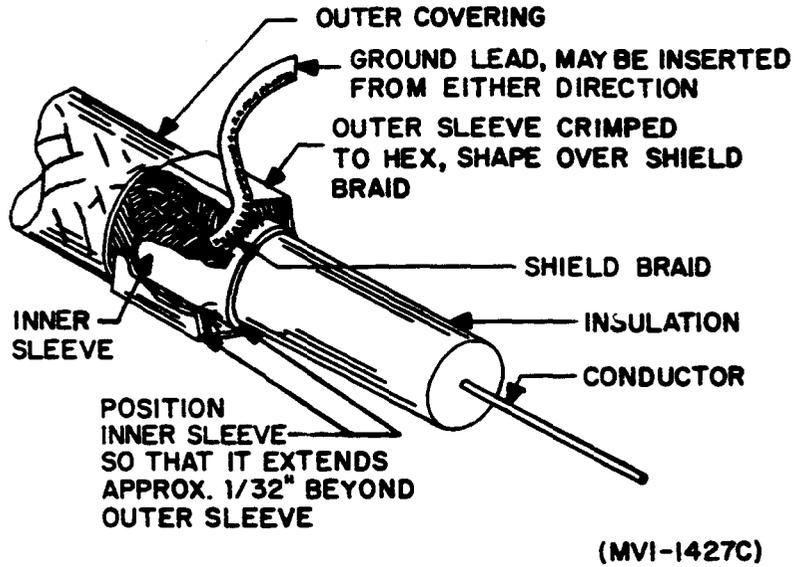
SOLDERLESS CONNECTION TO SHIELD GROUND LEAD. PARA. (1.31, 5.2215)
